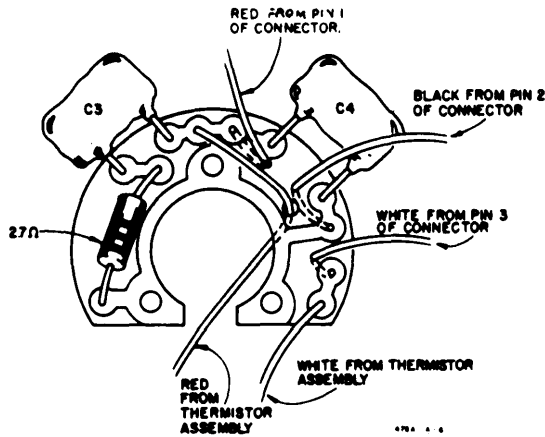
, Model 478A Printed Circuit Assy Wiring
